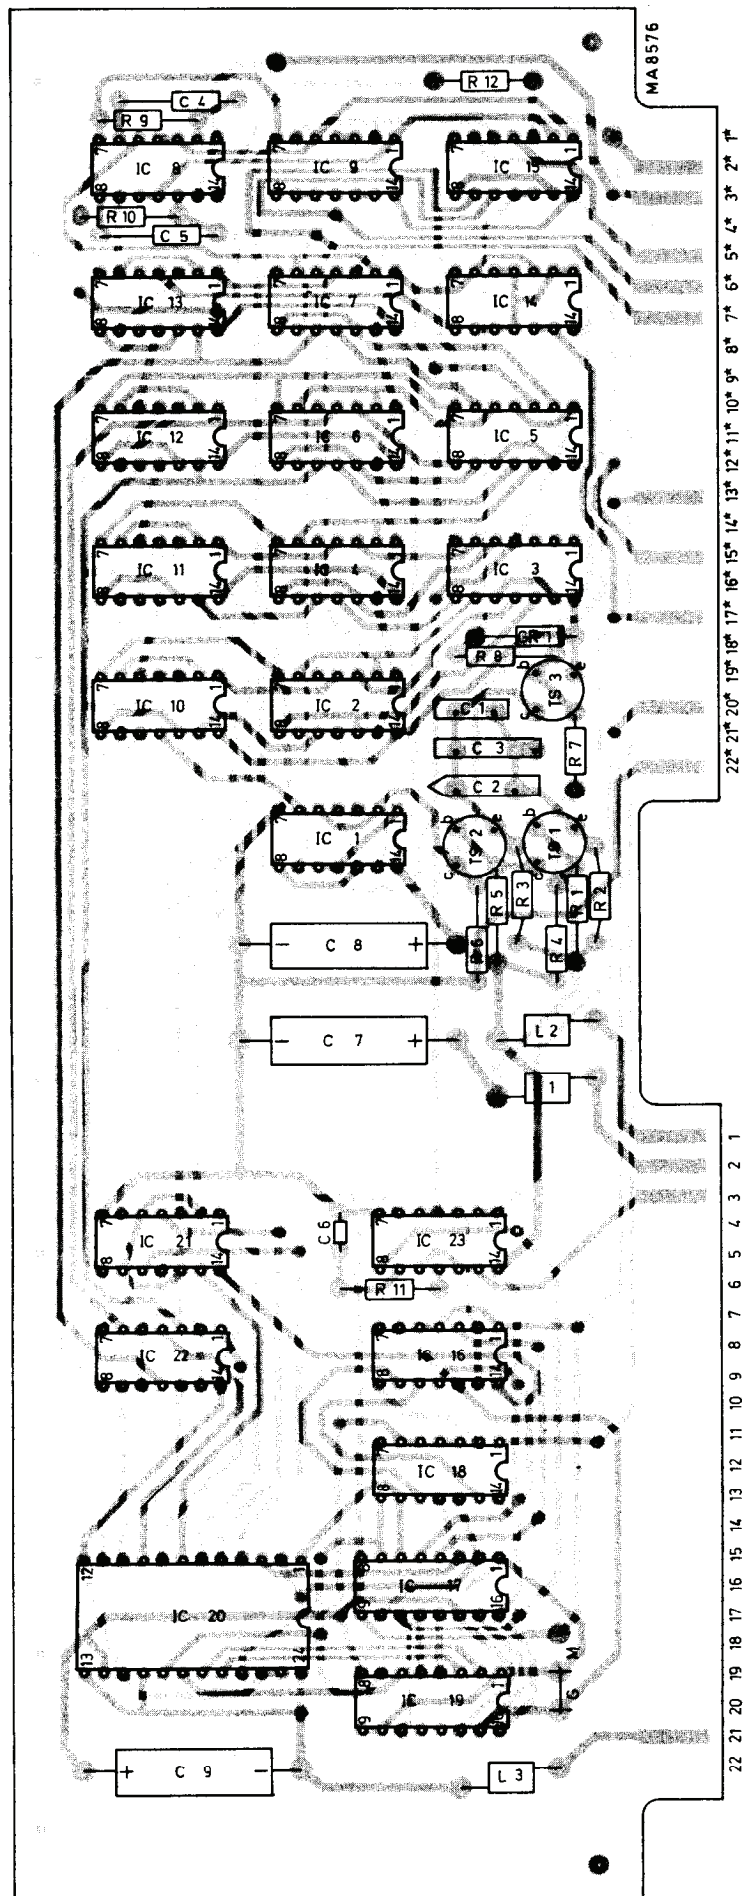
Printed wiring board, circle memory, unit 2
